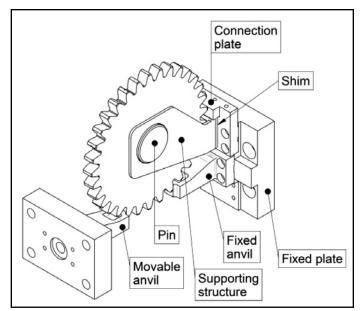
Bending fatigue test apparatus: 3-D schema and part nomenclature.
